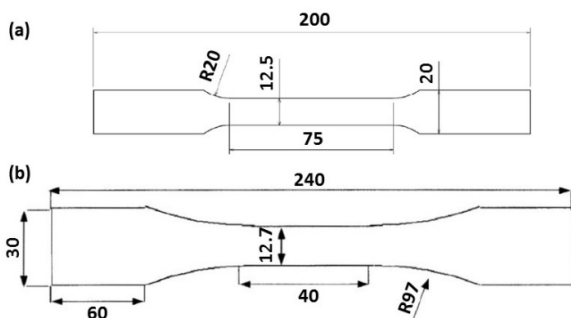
The tensile (a) and fatigue (b) test specimen geometries
